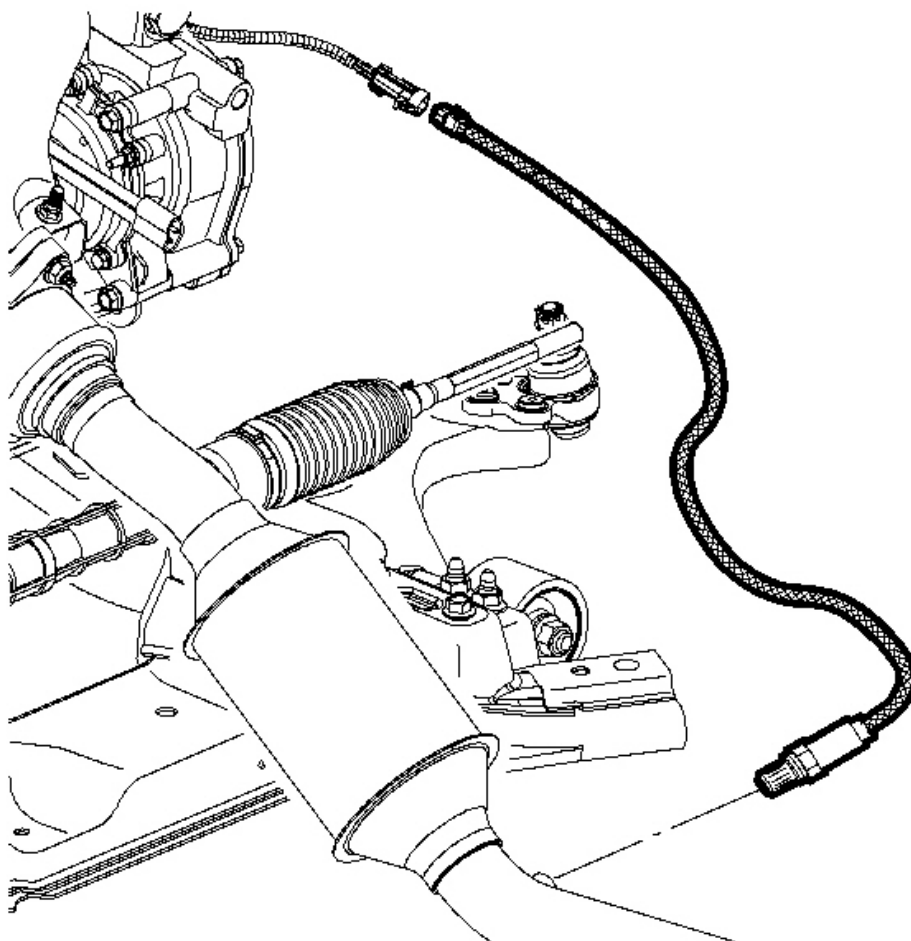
View Of Exhaust Manifold Pipe (L61)
